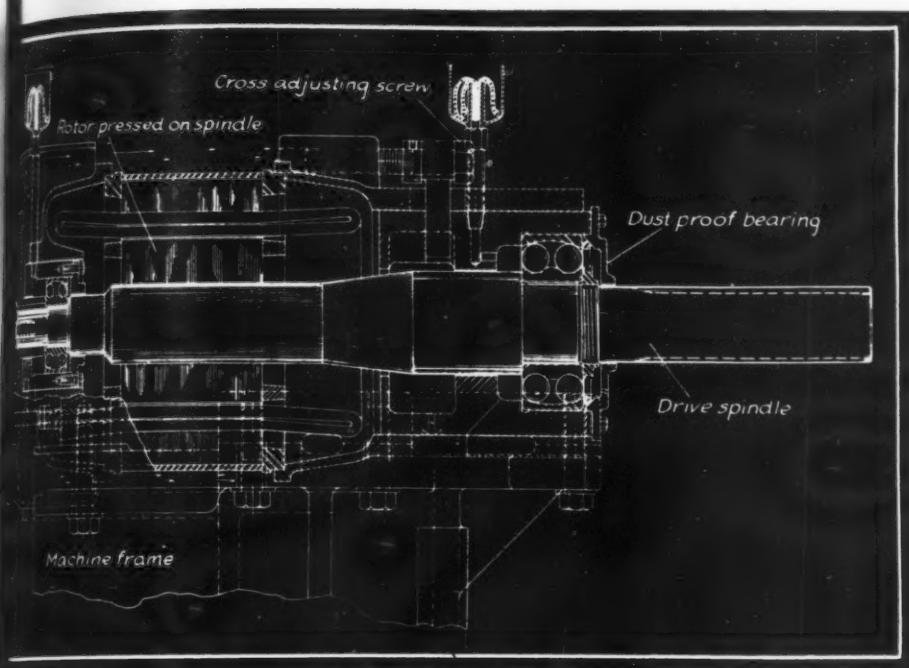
Top and bottom horizontal spindle assembly. Bearing housing is dustproof
